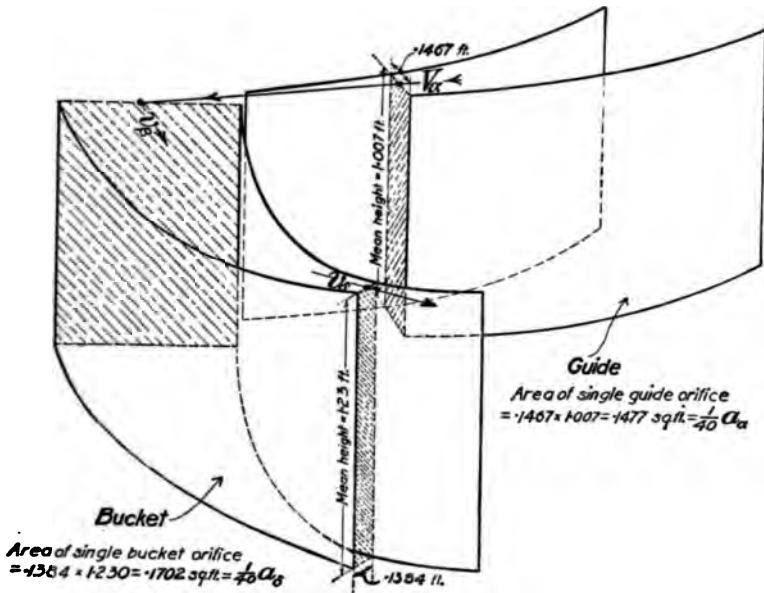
Showing the Dimensions which determine the Guide and Bucket Orifices in a Simple Form of Turbine. (This is the Francis Wheel.)
